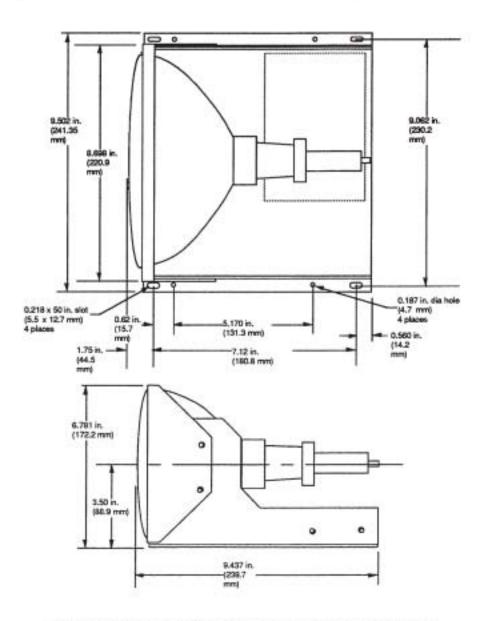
Mounting Dimensions, 9-inch CRT Display Monitor
